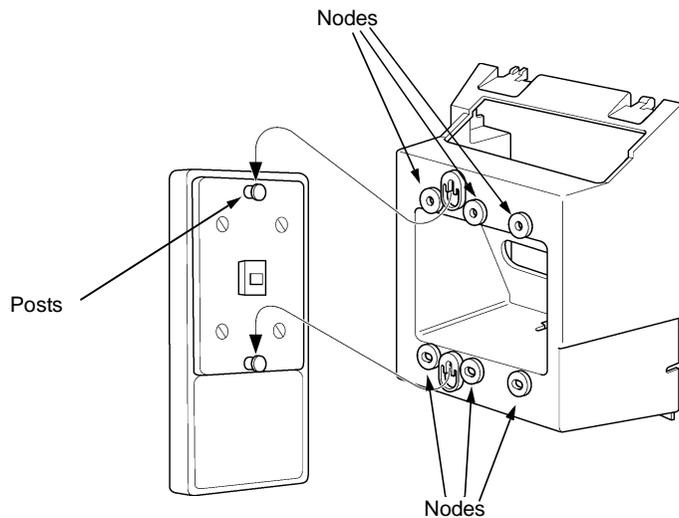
Attaching the Wall Mount Unit to the Wall
